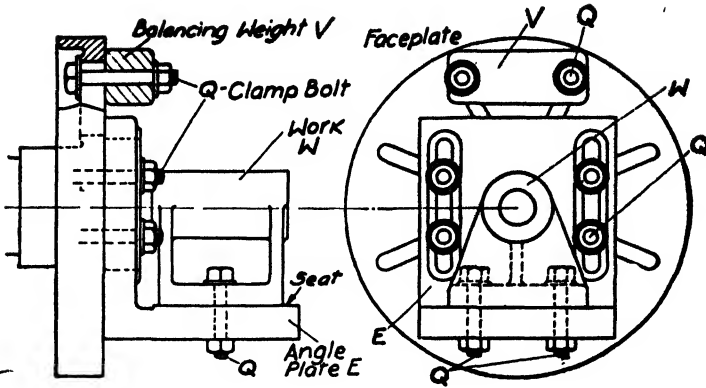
Boring a Casting by Clamping It on an Angle Plate Clamped to the Faceplate of a Lathe.
